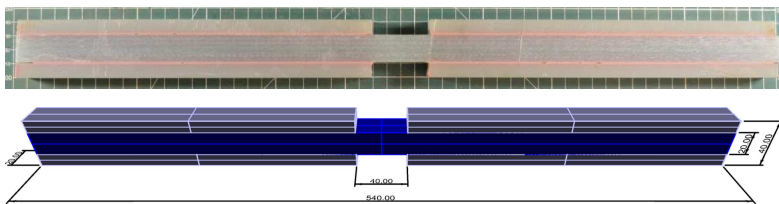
WS coupon geometry with straight gauge section and bonded biaxial tabs. 20 mm thick.
